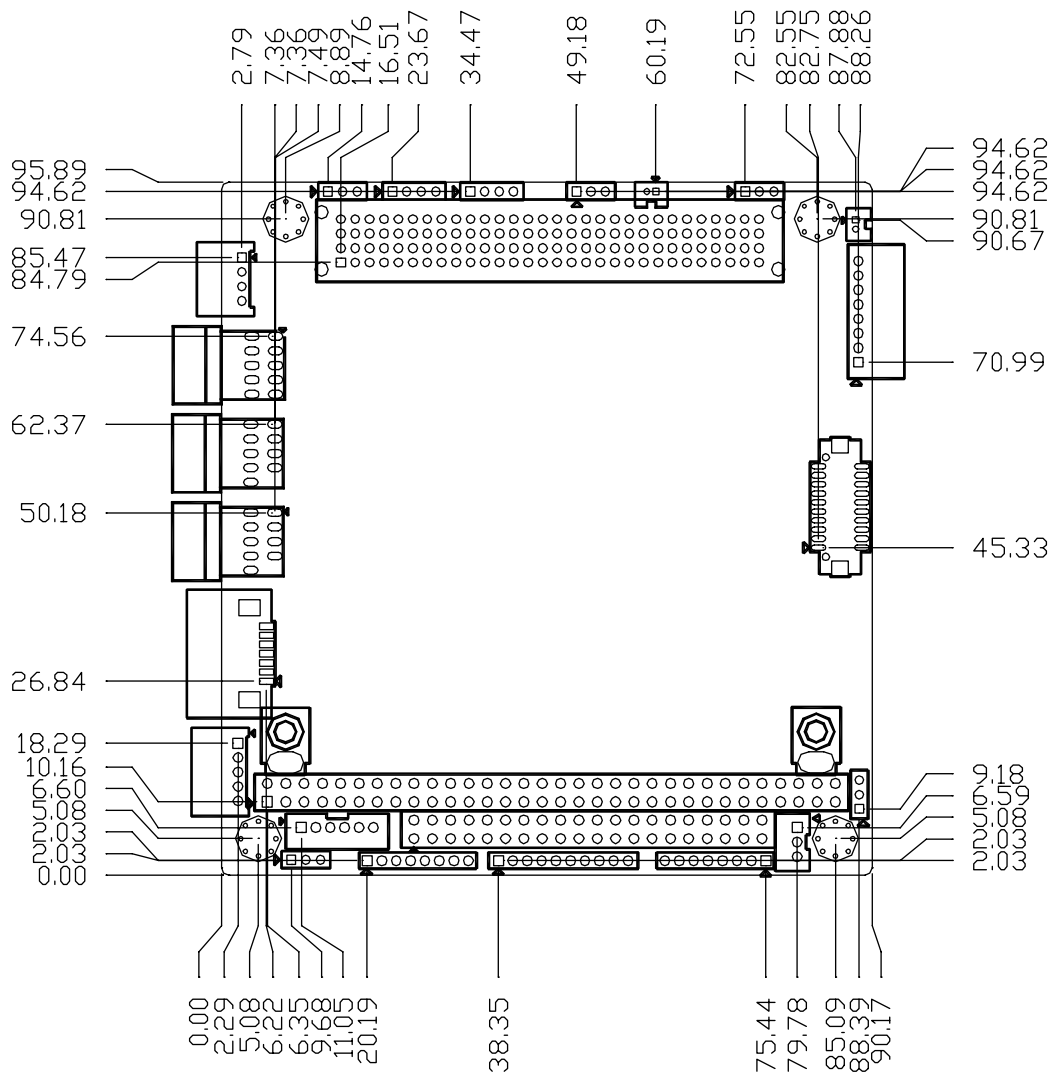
PCM-3362 Mechanical Drawing (Component Side)
